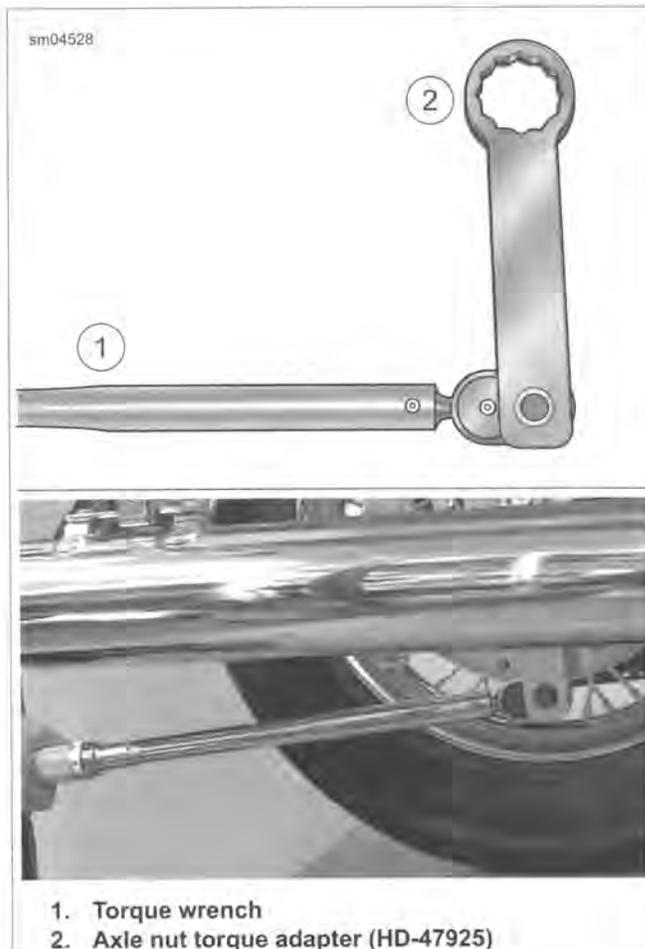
Install Tool Perpendicular to Torque Wrench
